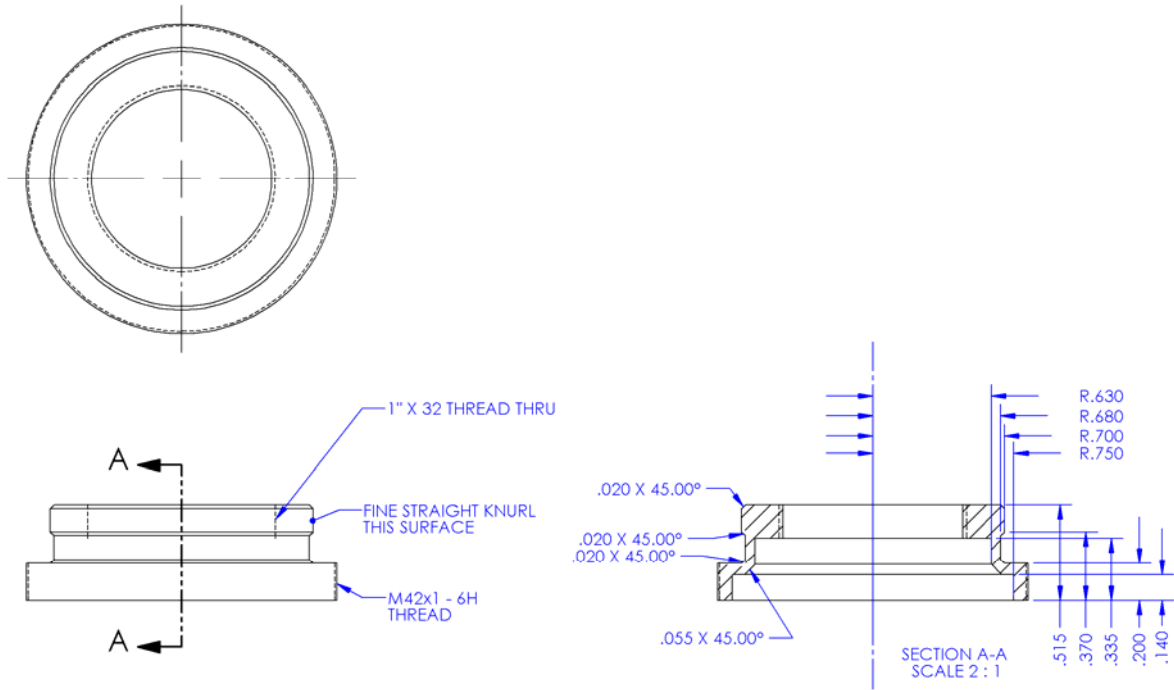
Mechanical drawing of C-mount lens adapter, all dimensions in inches.
